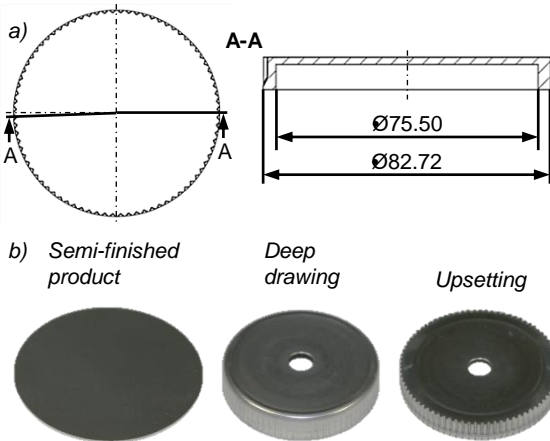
a) Part geometry and b) Steps from semi-finished product to final component
